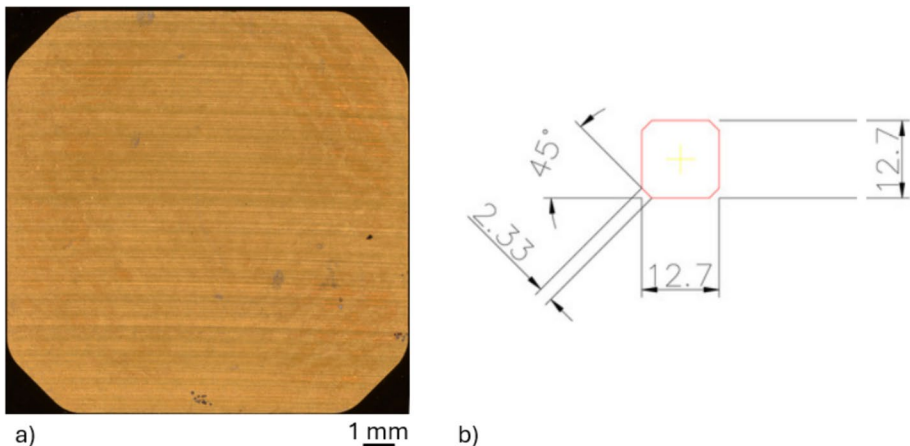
a) TiN-coated milling insert SEKN 1203 AFTN and b) technical drawing provided by the manufacturer, edge lengths given in mm
